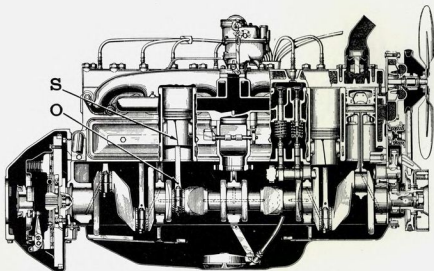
Side Section of 1901 Engine and Clutch Assembly
